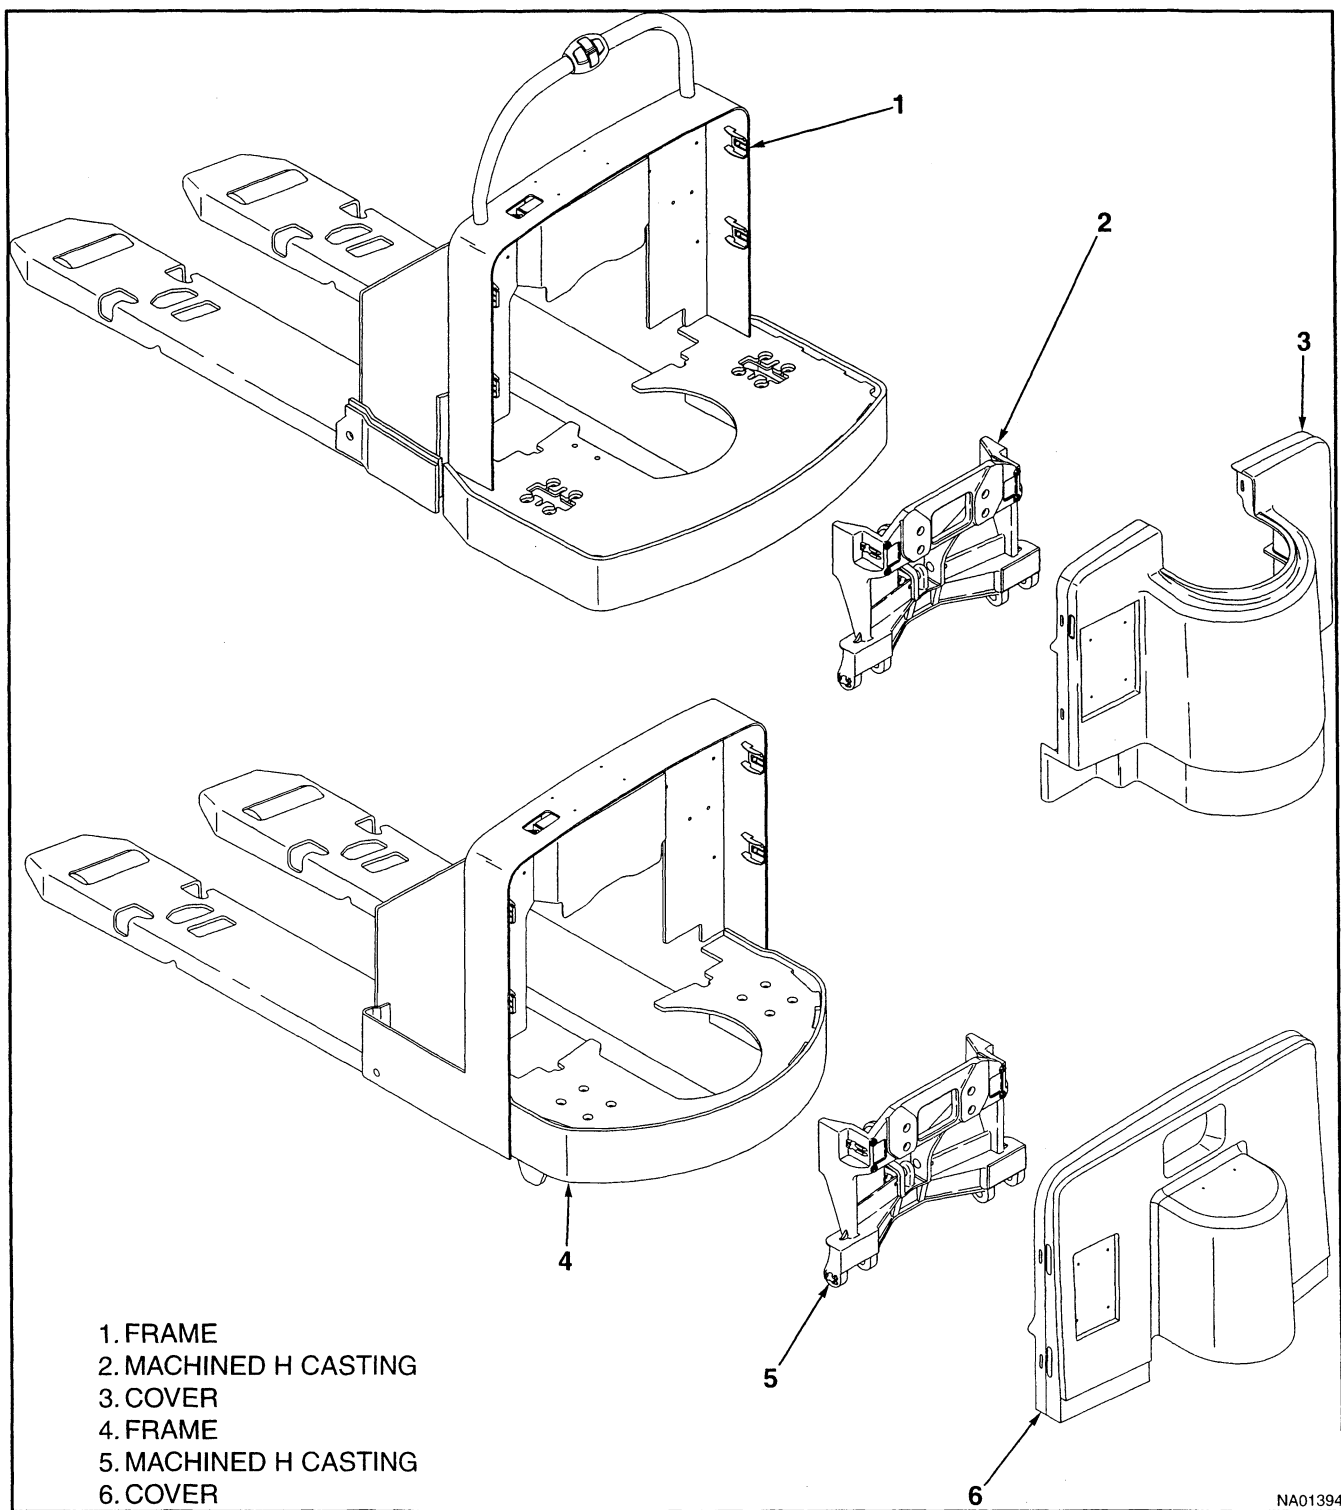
FRAME WELDMENT - B60Z, W 60Z
